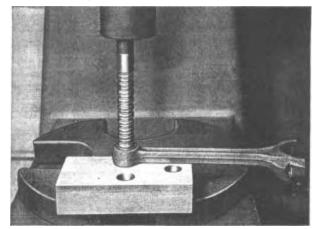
J-410 Connecting Rod Upper Bushing Burnisher
